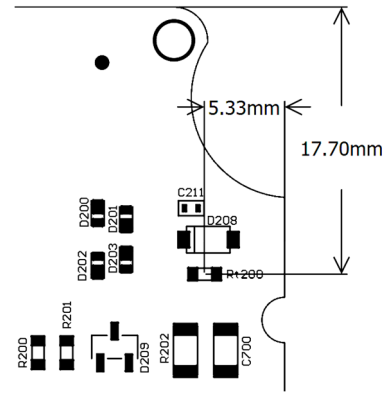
SMD Thermistor for TOP Channel Mounted on PCB
